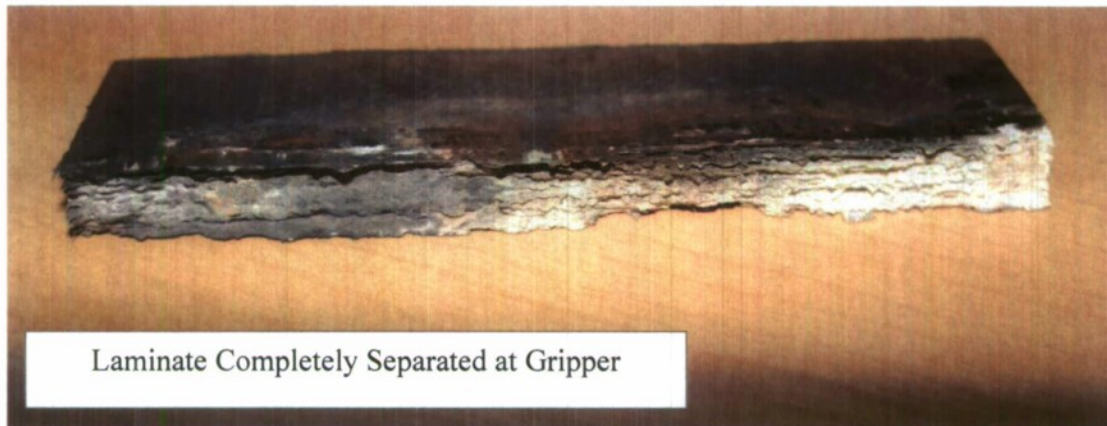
28-Ply Bolted Joint 5kip Fatigue Test 3 Failure Photo
